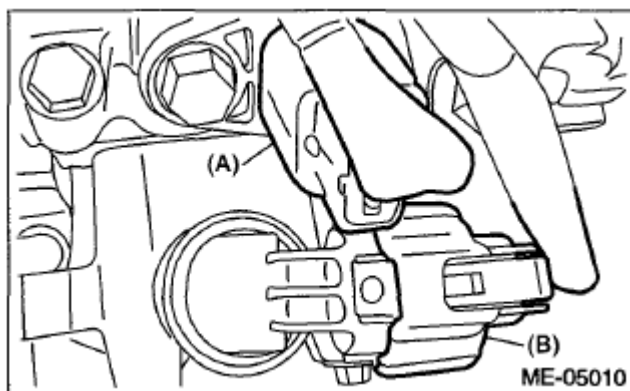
Identifying Exhaust Camshaft Position Sensor LH Connector And Exhaust Oil Flow Control Solenoid Valve LH Connector
